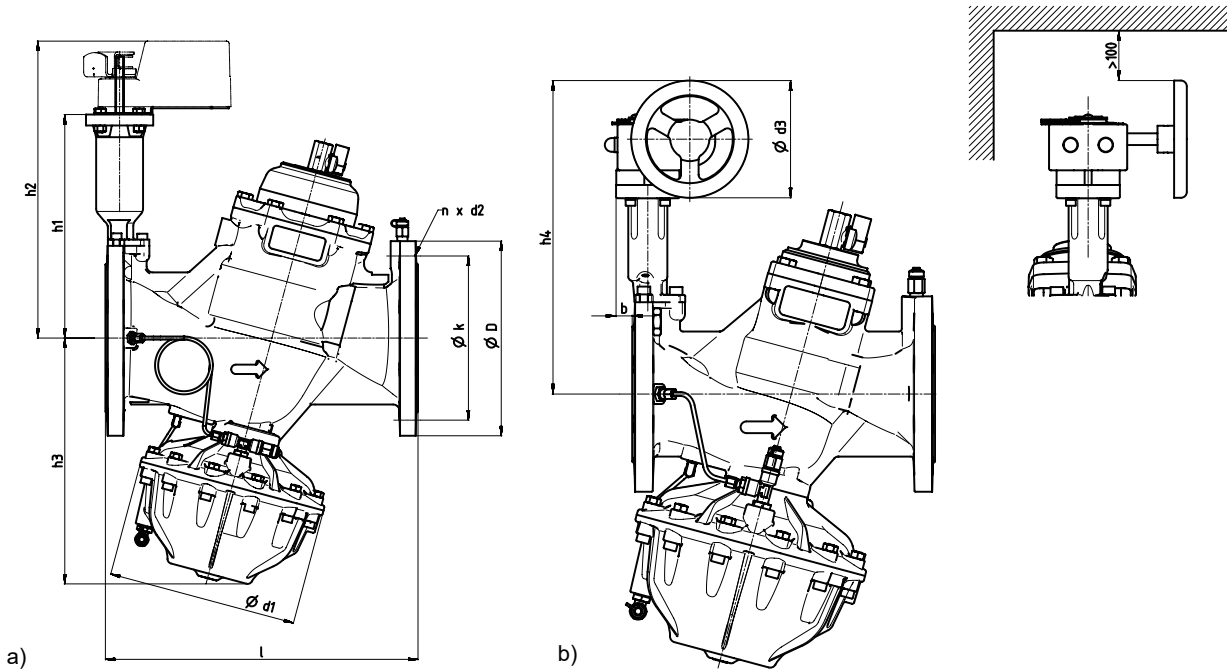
Dimensions DN 65 - 150 a) Version with actuator b) Version with manual gearbox
